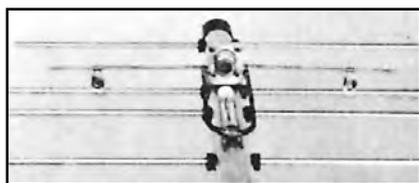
Element-mounting detail. Elements are mounted through the boom using plastic insulators. Stainless steel push-nut retaining rings hold the element in place.
